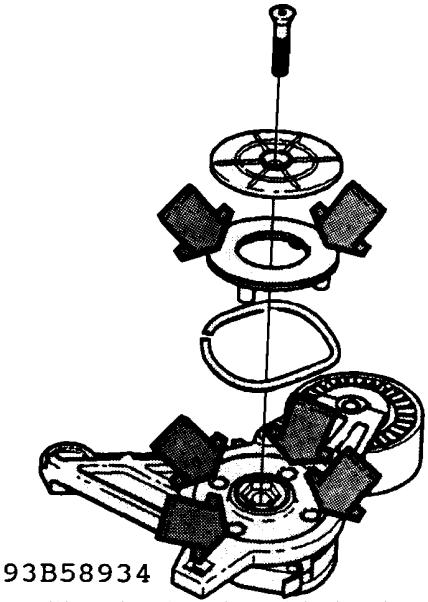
Auxiliary Drive Belt Tensioner Lubrication Points Courtesy of Volvo Cars of North America.
